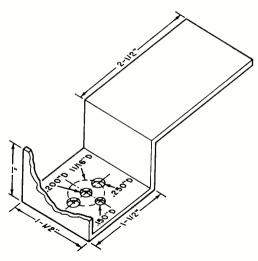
Drilling and bending details for the heat sinks used at Q3. Cut from aluminum sheet stock.
